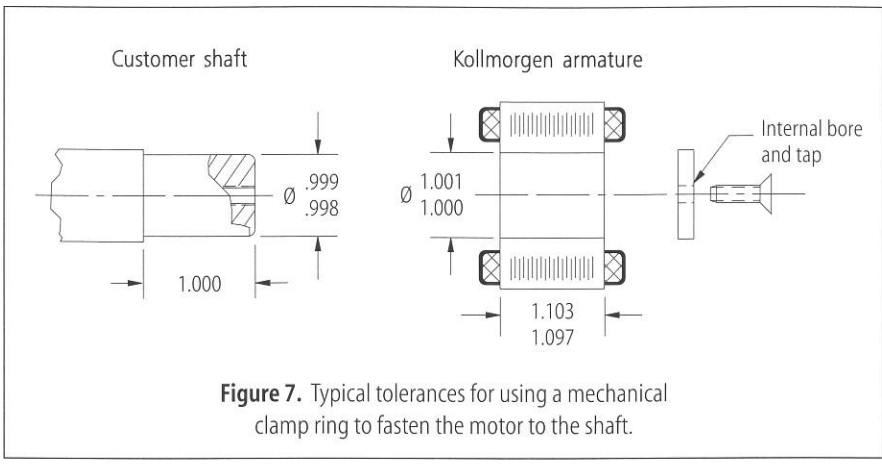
Typical tolerances for using a mechanical clamp ring to fasten the motor to the shaft.
